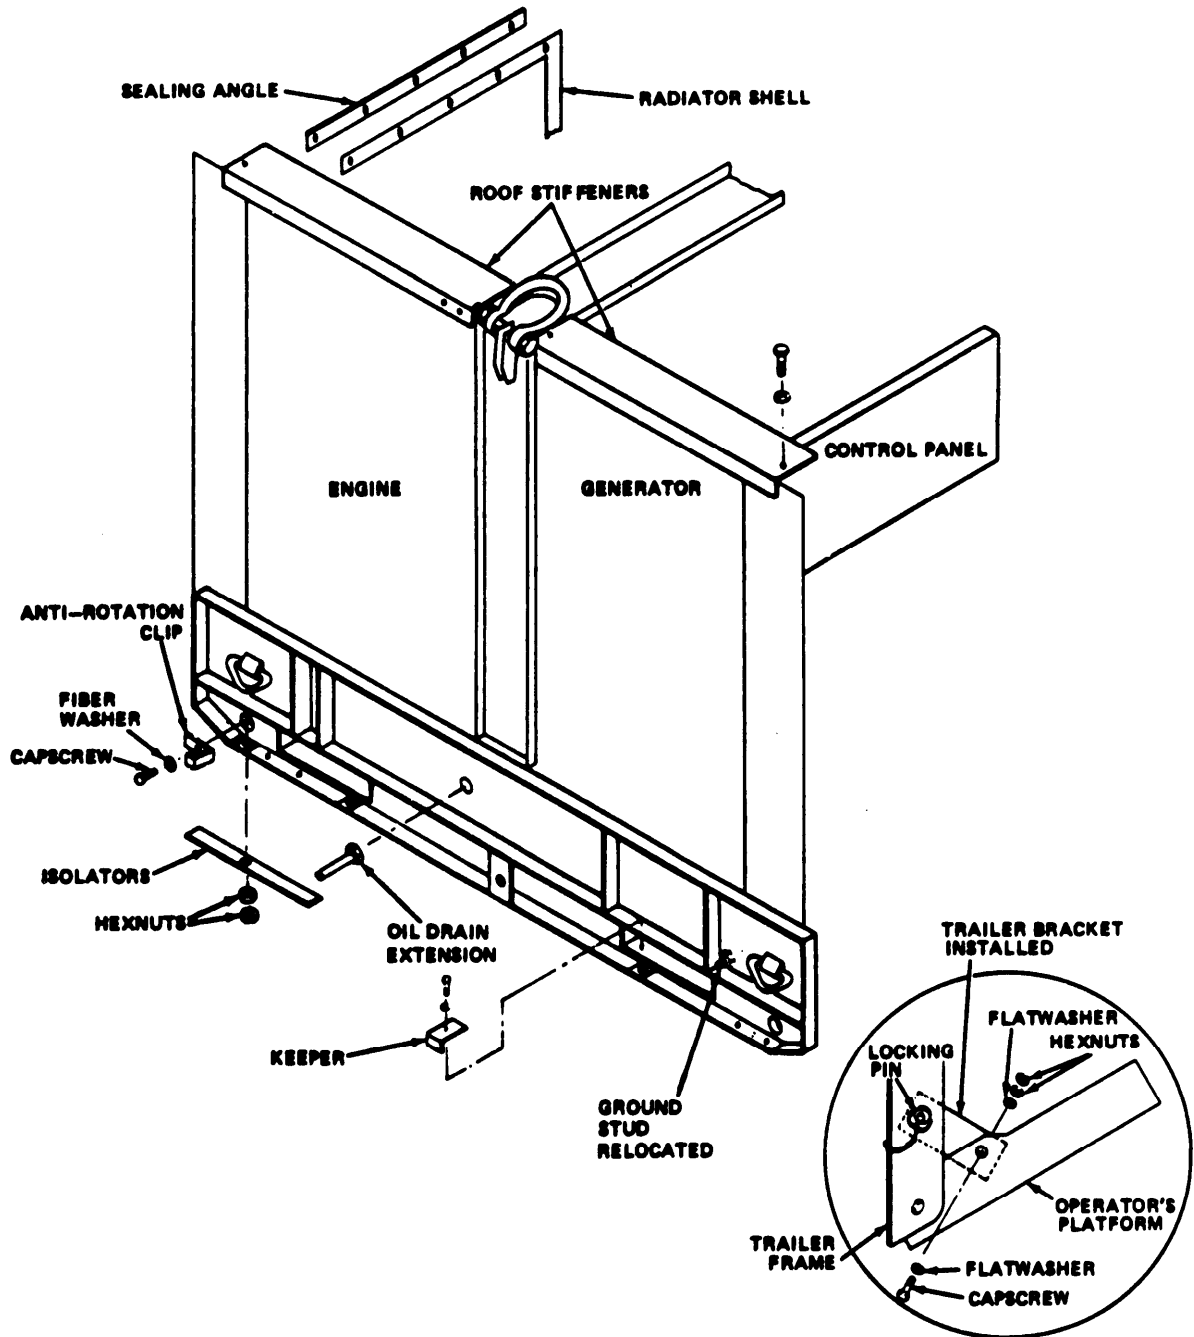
Roof Stiffeners, Sealing Angle, Oil Drain, Isolators, Bottom Panel Tray Assembly, and Trailer Brackets
